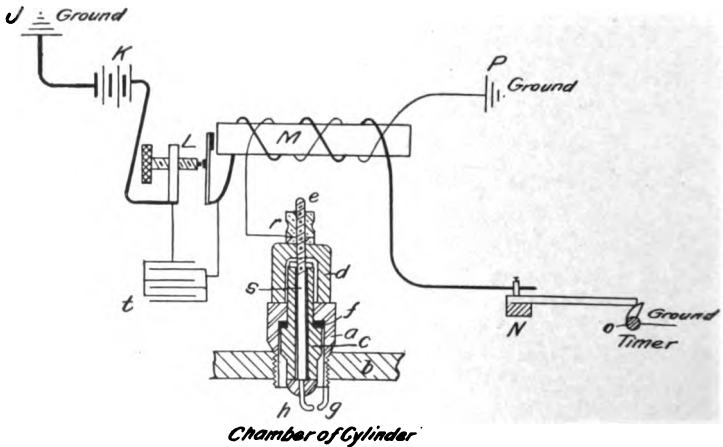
Single Cylinder Jump Spark Ignition Showing Details of Spark Plug.
